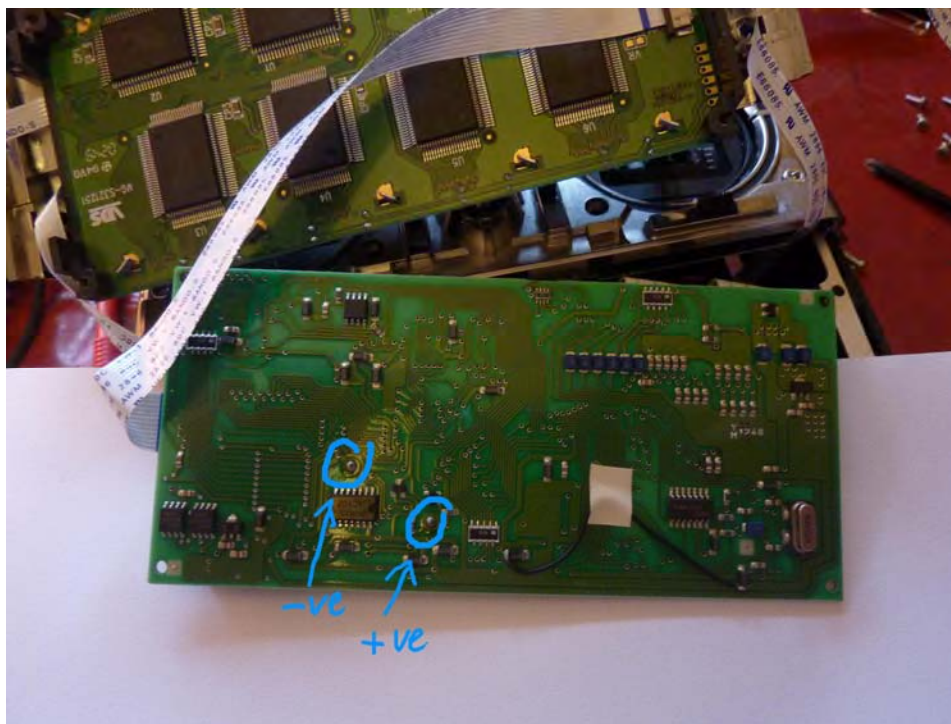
Top PCB 'Flipped' and Battery Terminals Exposed
